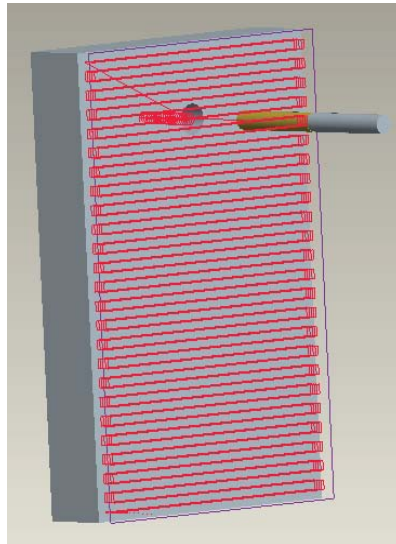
Tool path obtained to mill the frontal surface and the hole of the model
